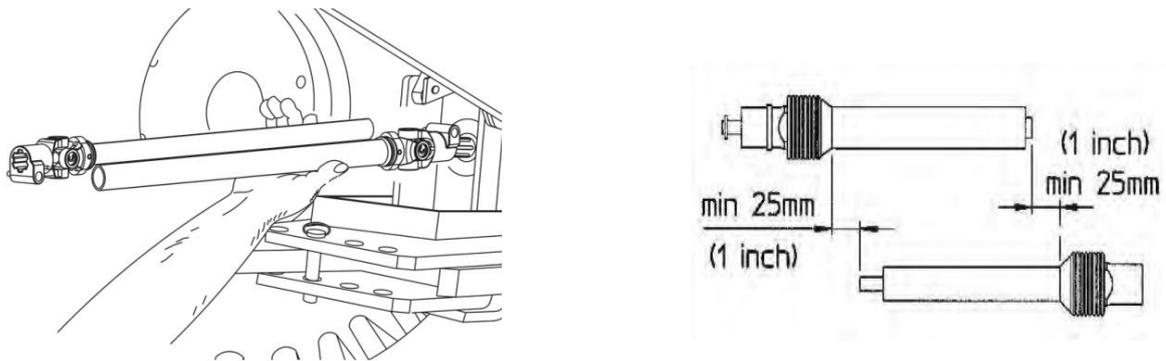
Example of adjusting the length of the Cardan shaft
